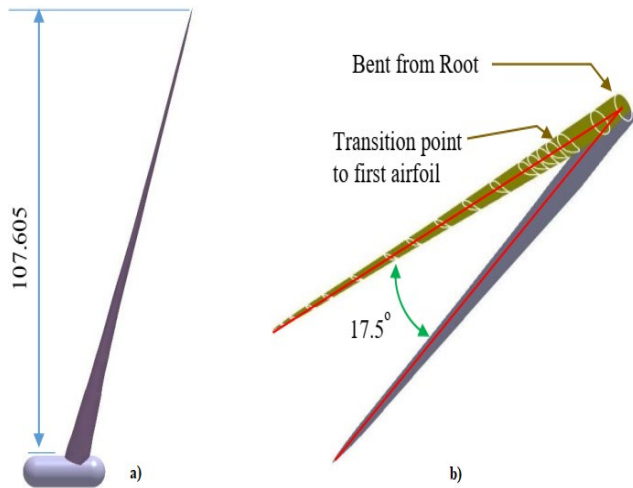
Geometry and dimensions of D2PAL blade: a) side view and b) isometric view
